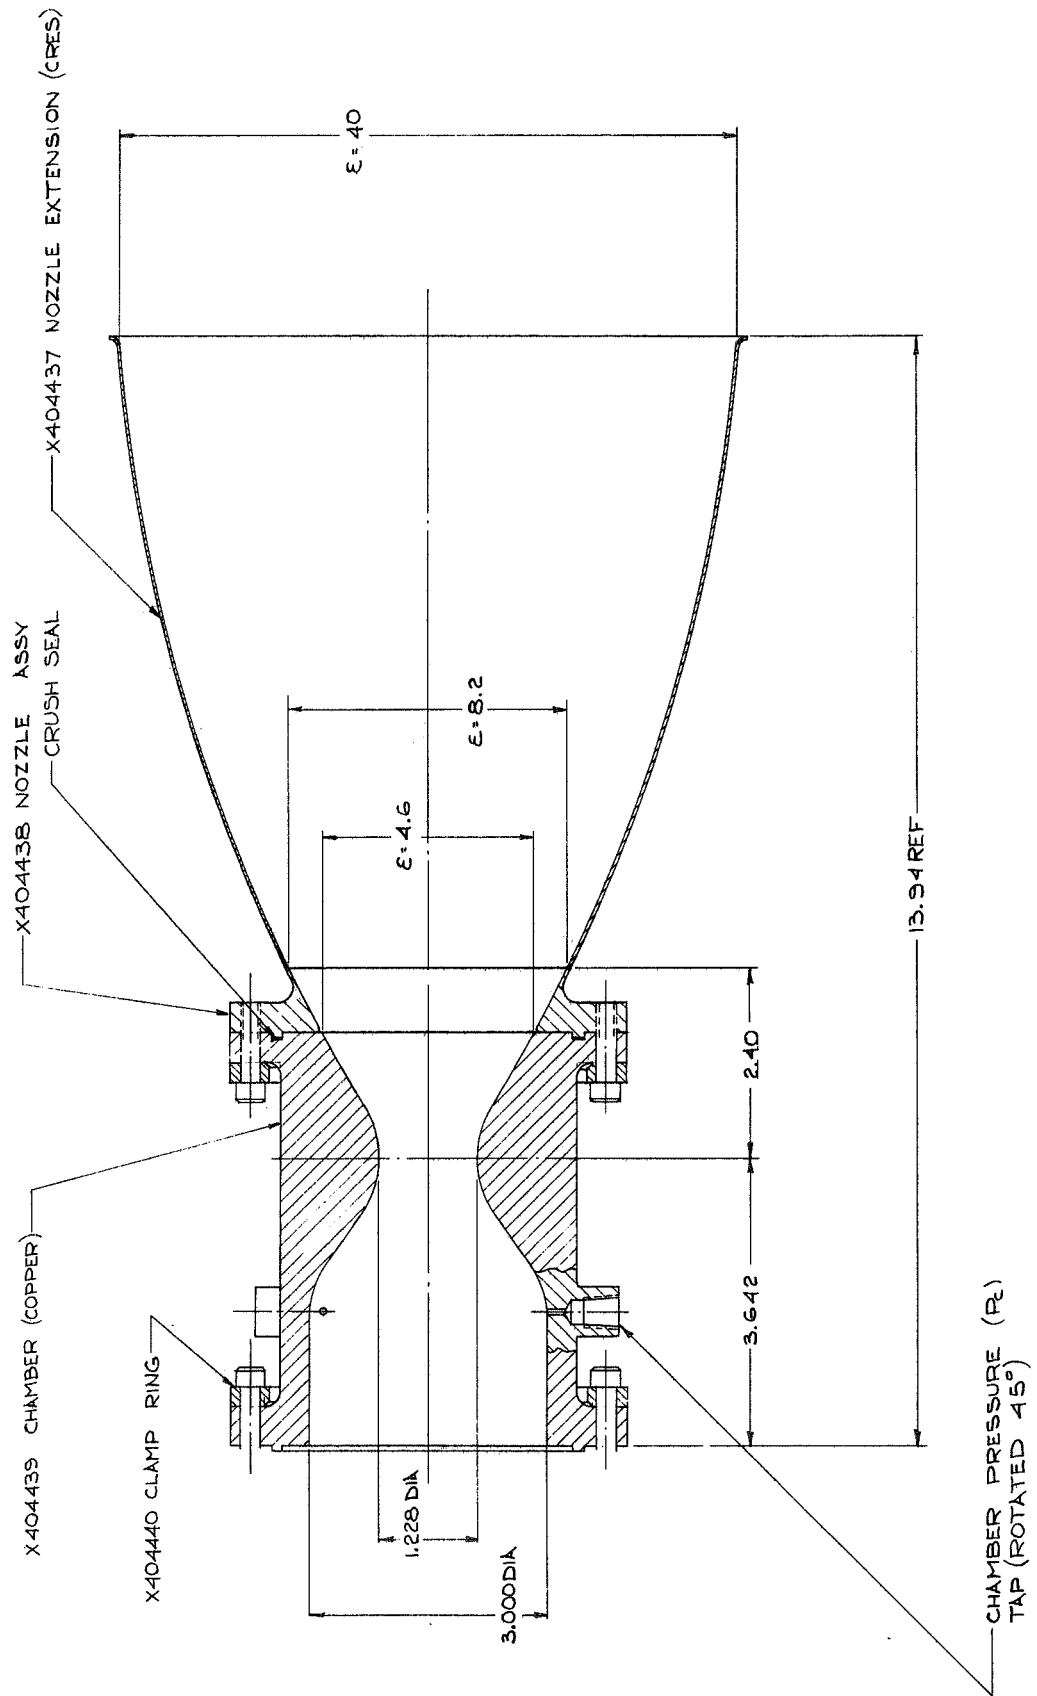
Altitude Thrust Chamber Assembly—Low Pressure Thruster
